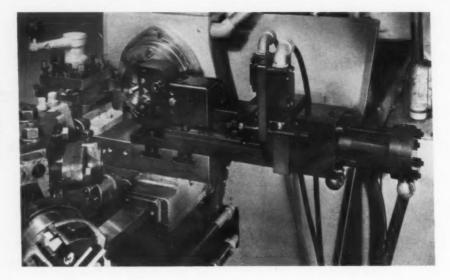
When a one- or two-roll threading attachment is employed on a conventional lathe, an auxiliary power feed unit is required. The unit illustrated is hydraulically actuated.
